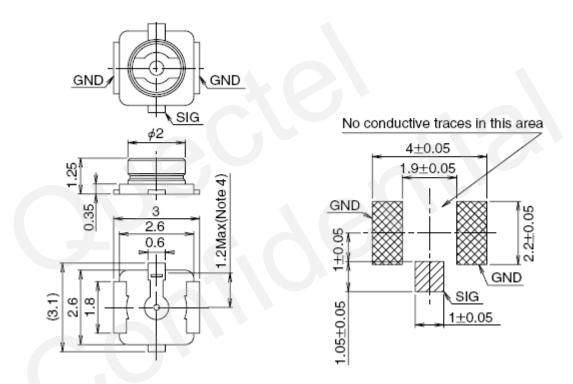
Dimensions of the UF.L-R-SMT connector (Unit: mm)
